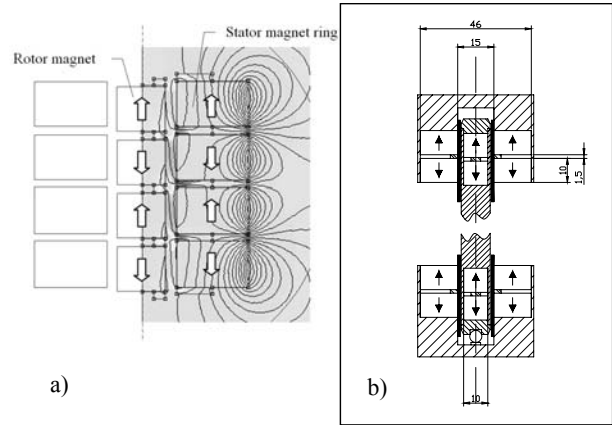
a) Principle of stacked passive magnetic bearing. Shown are four layers. b) The final bearing design.
